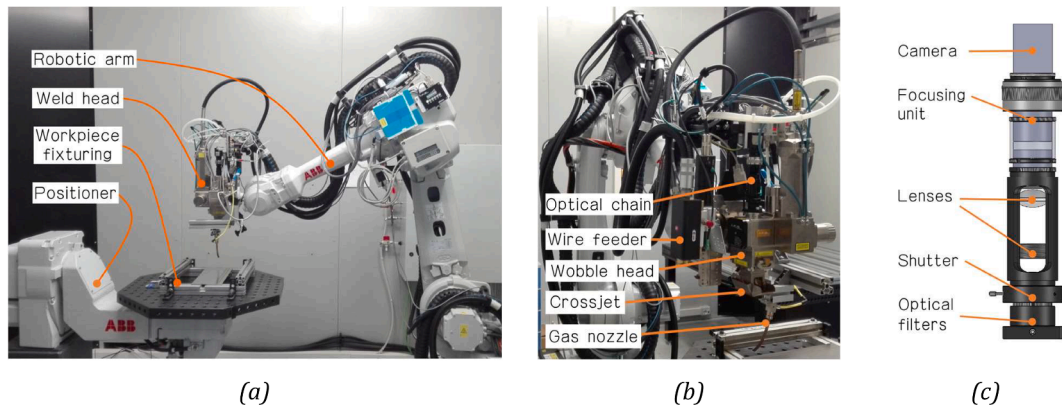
The developed robotic laser beam welding cell and weld control system: a) the robotic cell, b) the wobble head, c) the optical chain.
